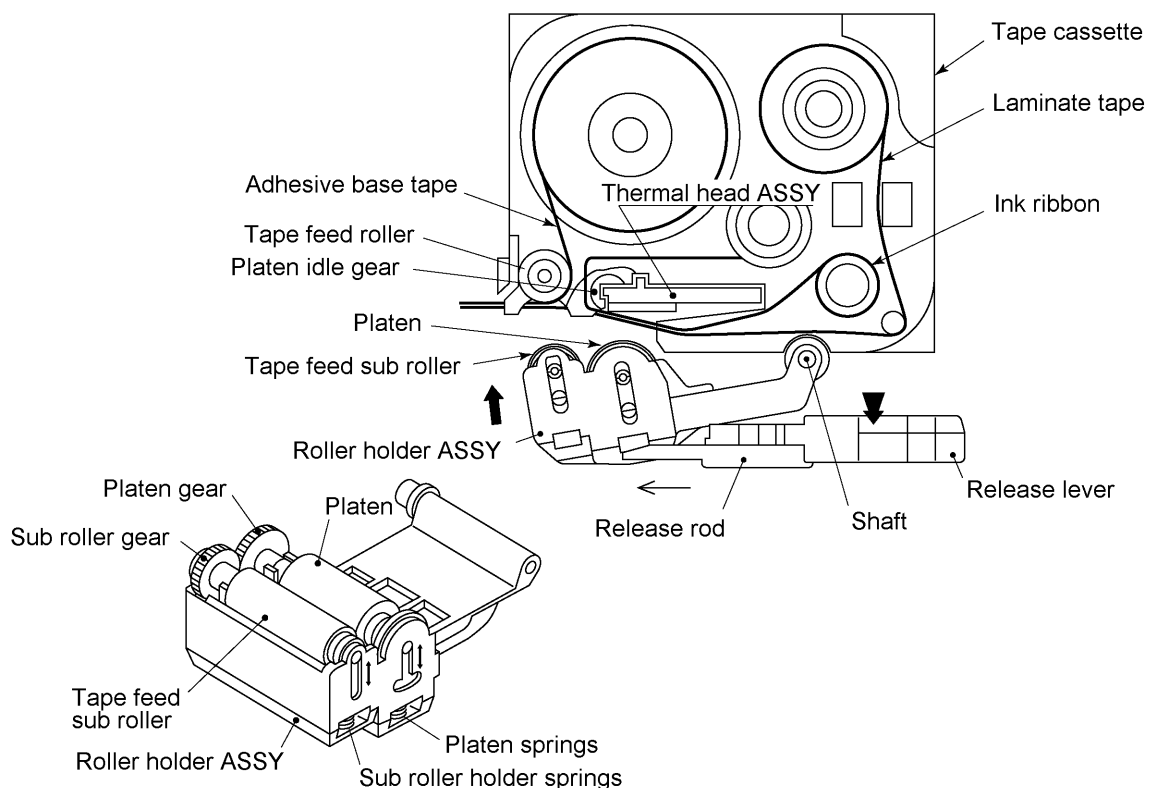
Roller Holder ASSY Setting & Retracting Mechanism
